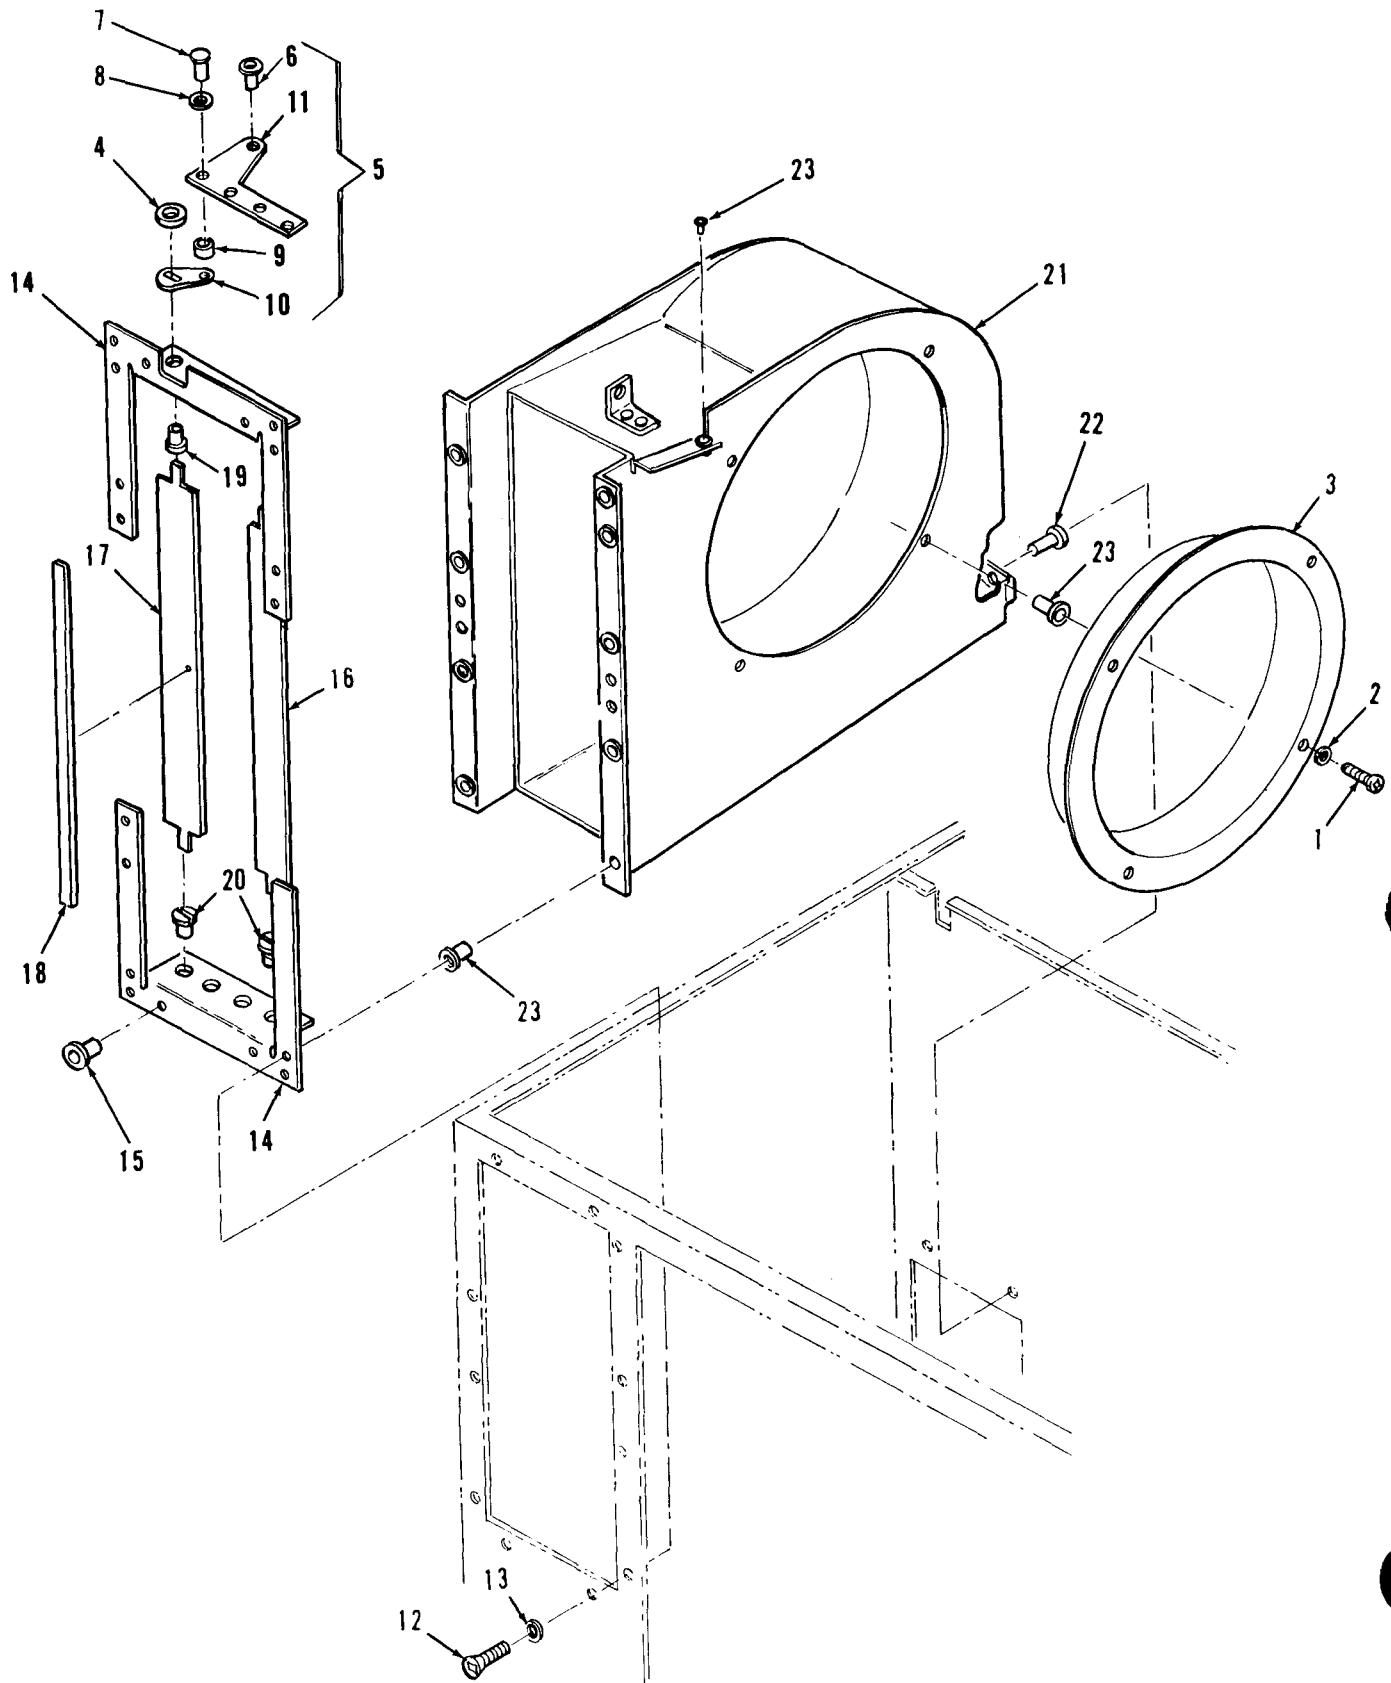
Louver and Condenser Fan Housing Assembly, Right Side
